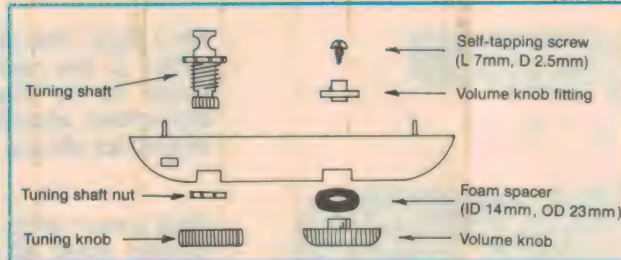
Use this diagram as a guide when you're fitting the tuning knob stub shaft and knob, and also the volume knob and its adaptor boss to the front of the case.
